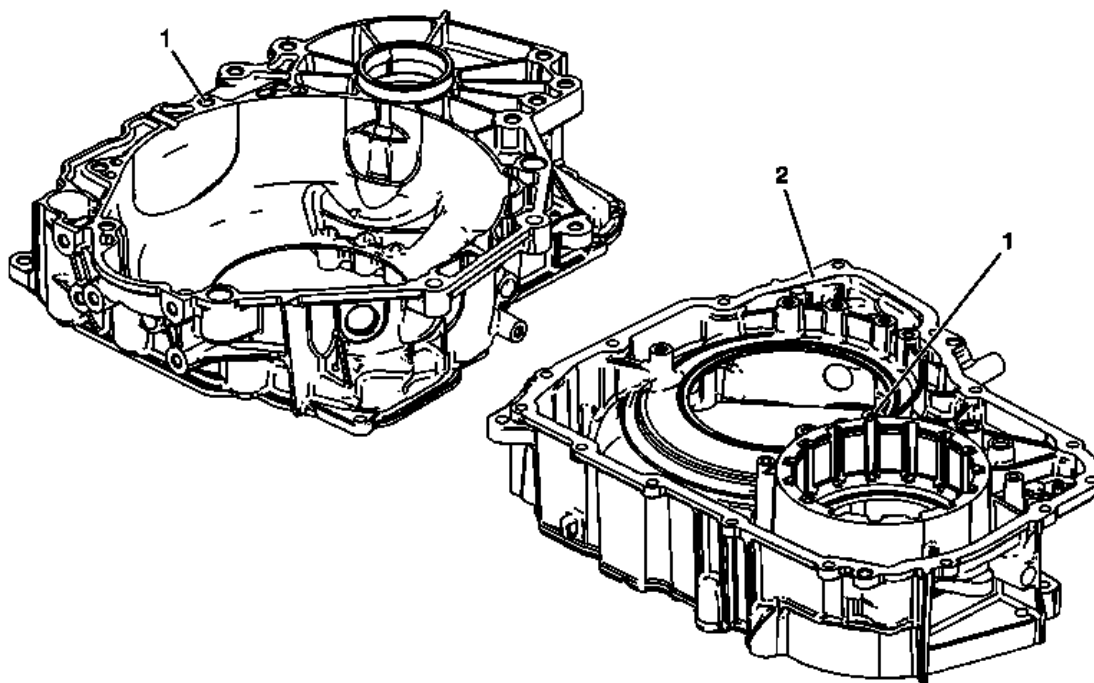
Identifying Torque Converter Housing Inspection Areas
